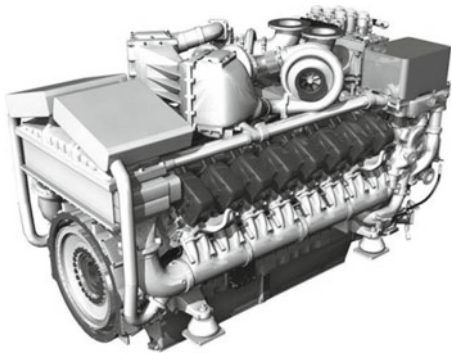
Example of a large high-speed engine (MTU S4000) (Picture MTU)
